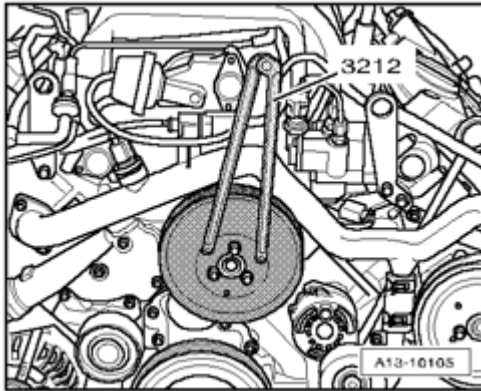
Loosening Bolts Use Spanner Wrench 3212 To Counter-Hold
